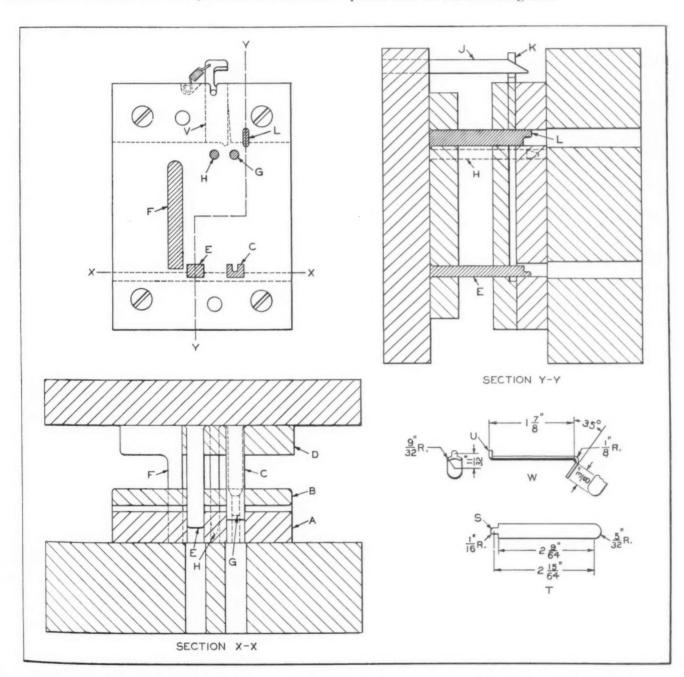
Die that Performs Forming, Bending and Blanking Operations on Part Shown at W in Three Stages
